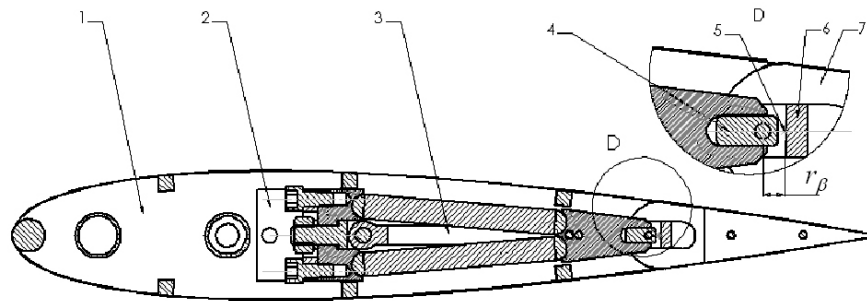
Actuator integration into the wing (SolidWorks model); 1 - wing body, 2 - actuator support, 3 - V-Stack Piezoelectric Actuator, 4 - slider, 5 - flap hinge line, 6 - adjustable support, 7 - trailing edge control surface (flap)
